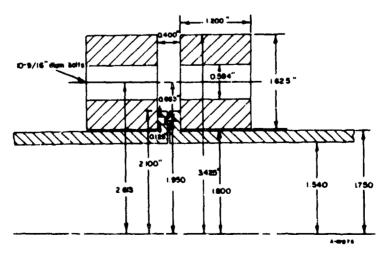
LOOSE-TYPE FLANGE GEOMETRY (RENE 41 - 1500 F)
